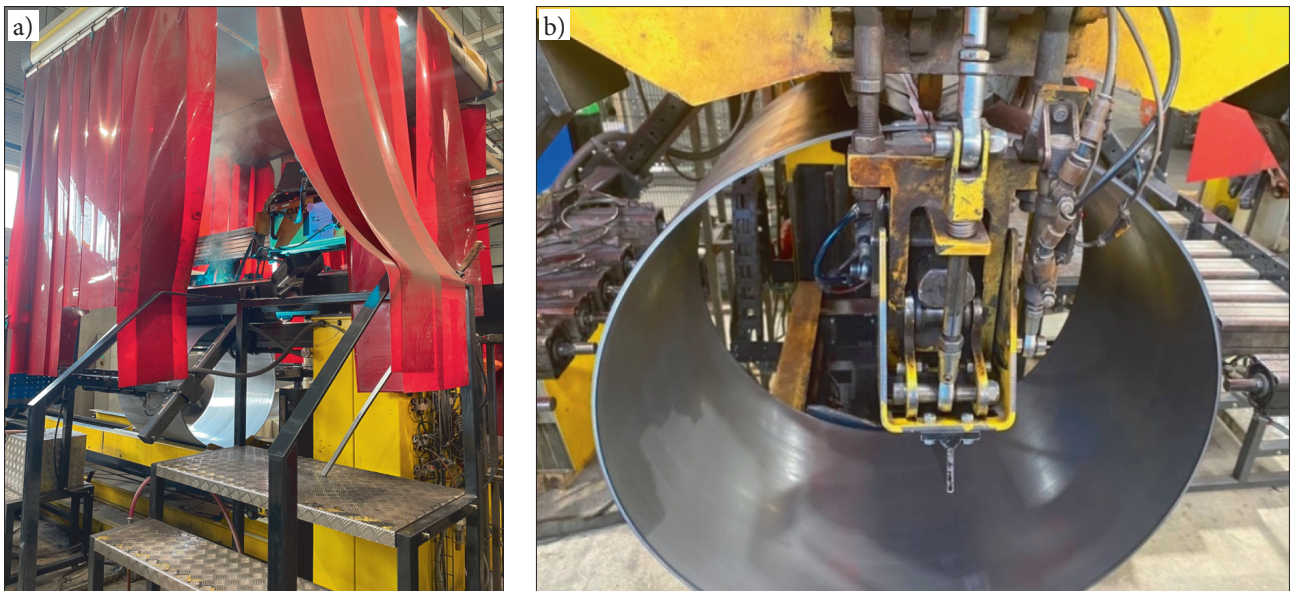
Station for the welding of special-purpose rims (having a diameter of more than 20"): a) main view, b) gripping clamps with a cylinder to be welded
